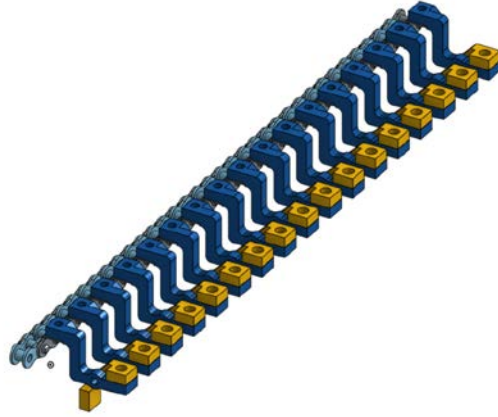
CAD Assembly of Chain and Magnetic Clamps
